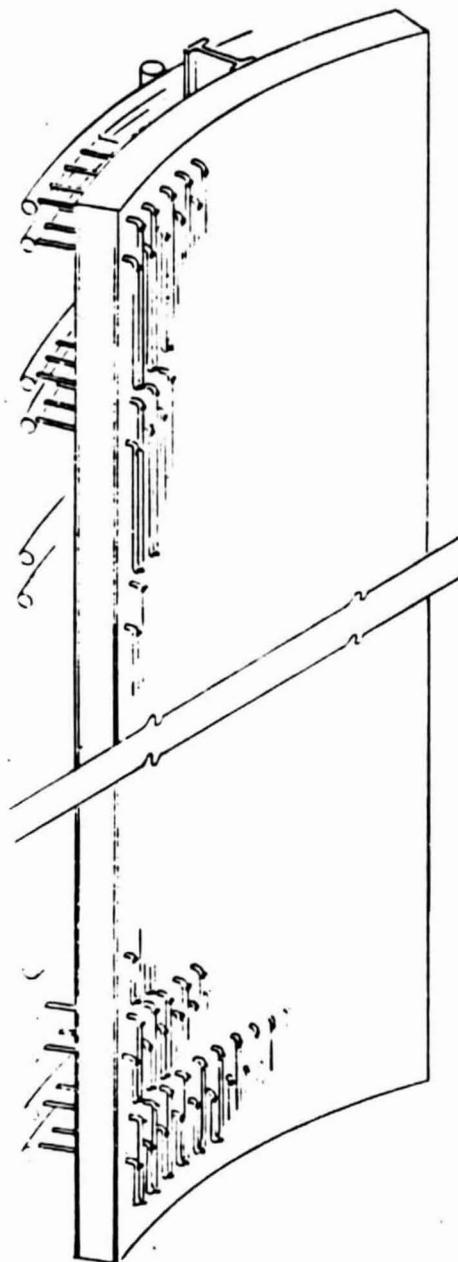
DECOMPOSER SUB ASSEMBLY
